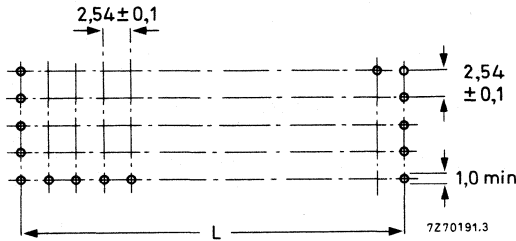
Hole pattern for male headers and mounting blocks. See Table 4, page 15, for dimension L.
